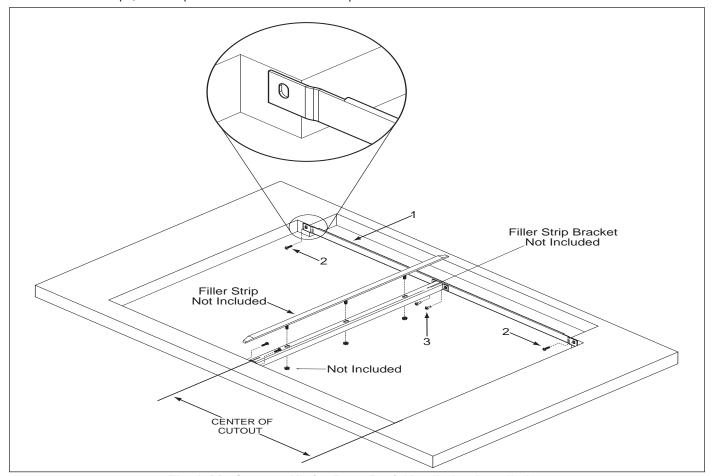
Support Kit for DownDraft Ventilation Installation
